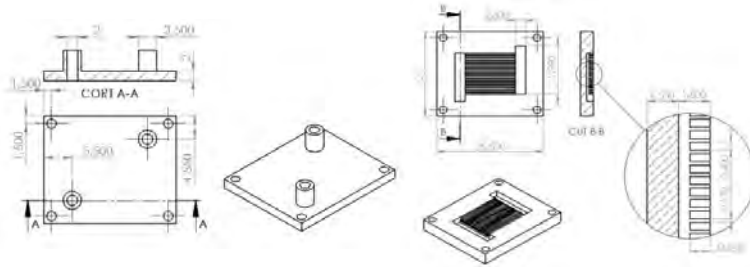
Technical drawing of the micro-heat sink (all dimensions in millimeters)
